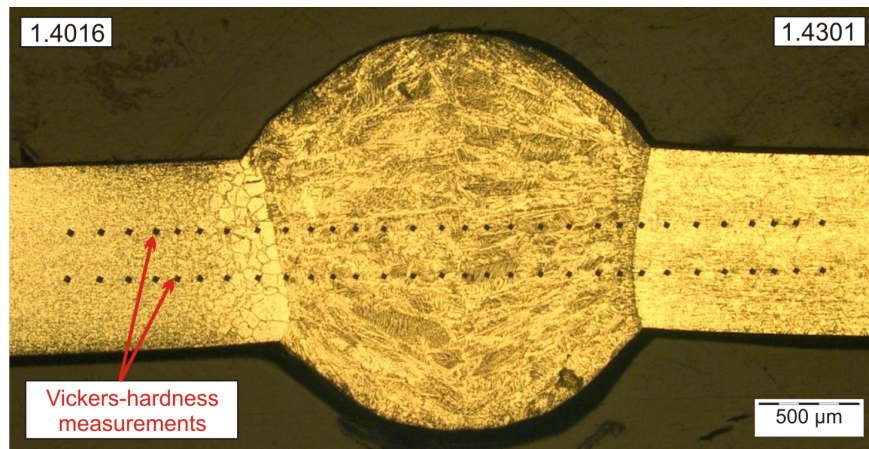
Lateral metallographic cross-section of a austenitic-ferritic weld of 1.4016 and 1.4301, welded with continuous-wave solid-state laser and filler wire 1.4576 (laser power 2.800 W, process feed rate 5 m/min, wire diameter 0,8 mm, wire feed rate 5 m/min).
